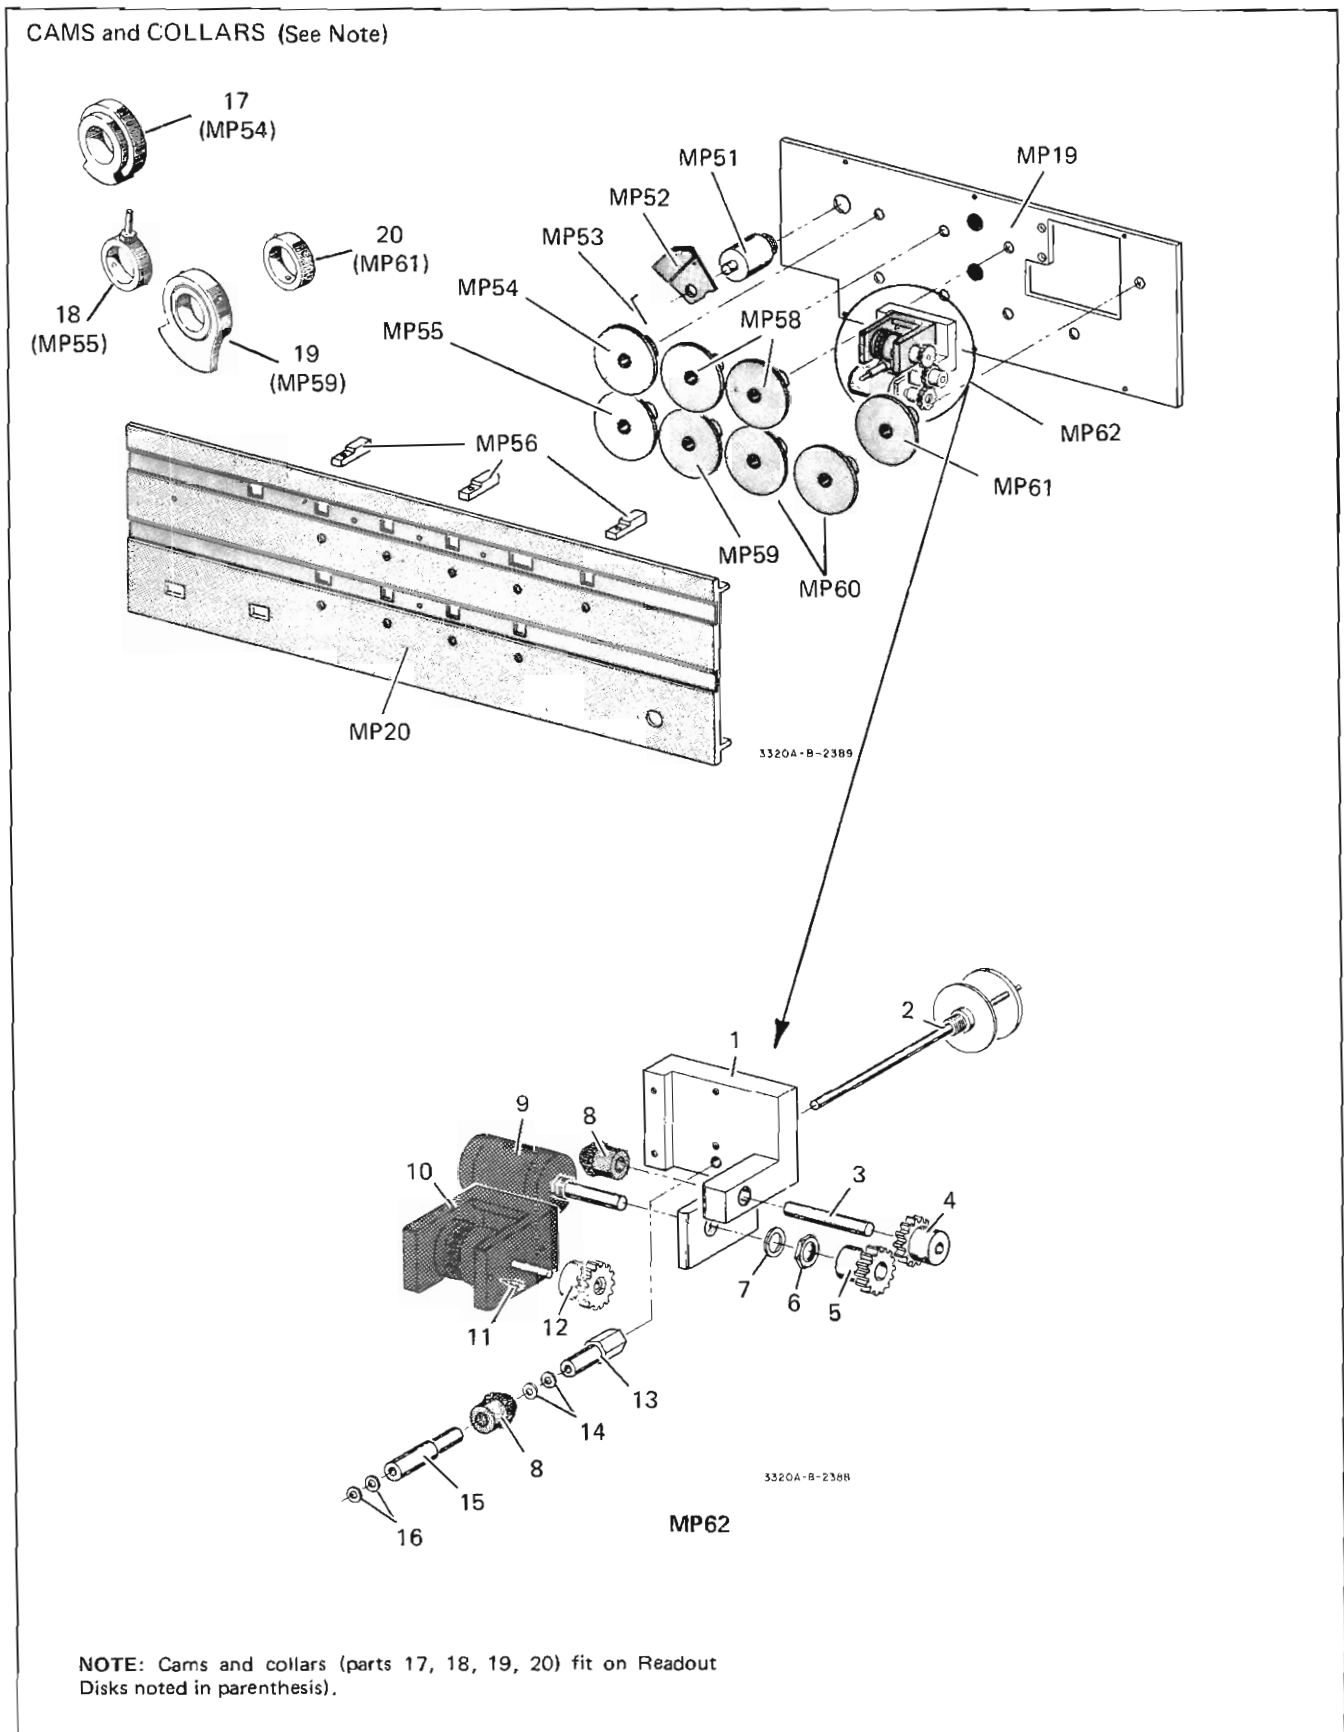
Front Panel and Vernier Control Mechanical Parts.
